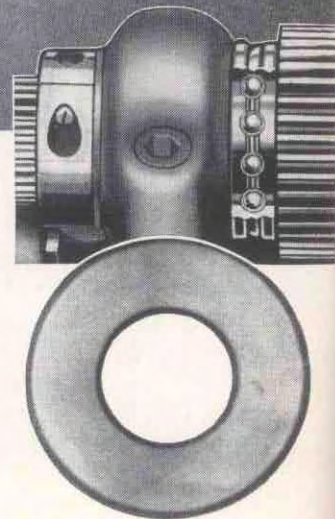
Bottom View of Headstock Showing Rigid Cross-Ribbed Construction
